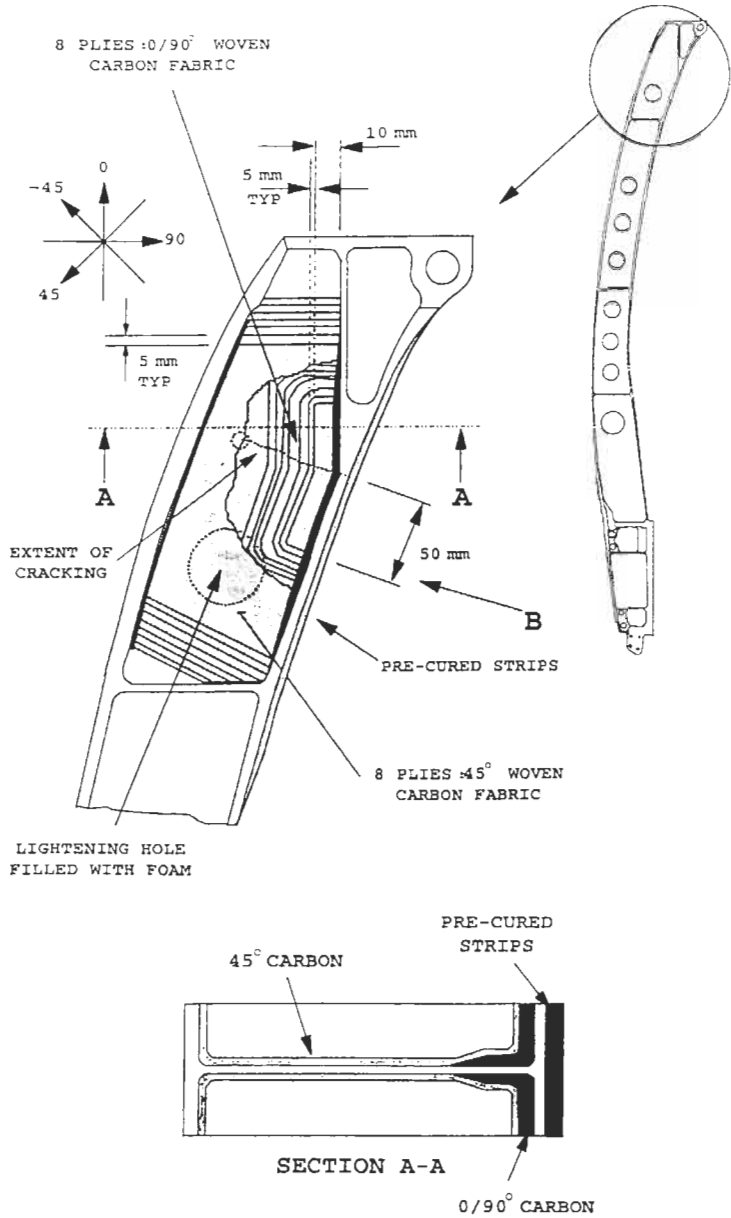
Repair details of X7875 port side frame WL3038 flange failure.
